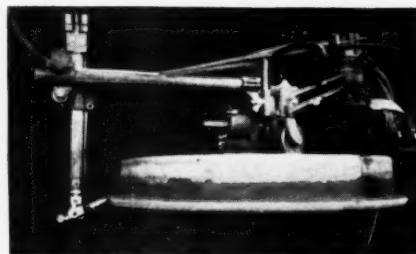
The top bevel of the flange (Cut No. 4) completes the sequence of the machine-cutting operations.
